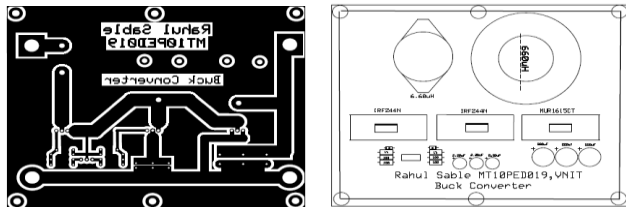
(a) PCB layout of bottom layer buck converter Fig.20.(b) PCB layout silk screen of buck converter.
